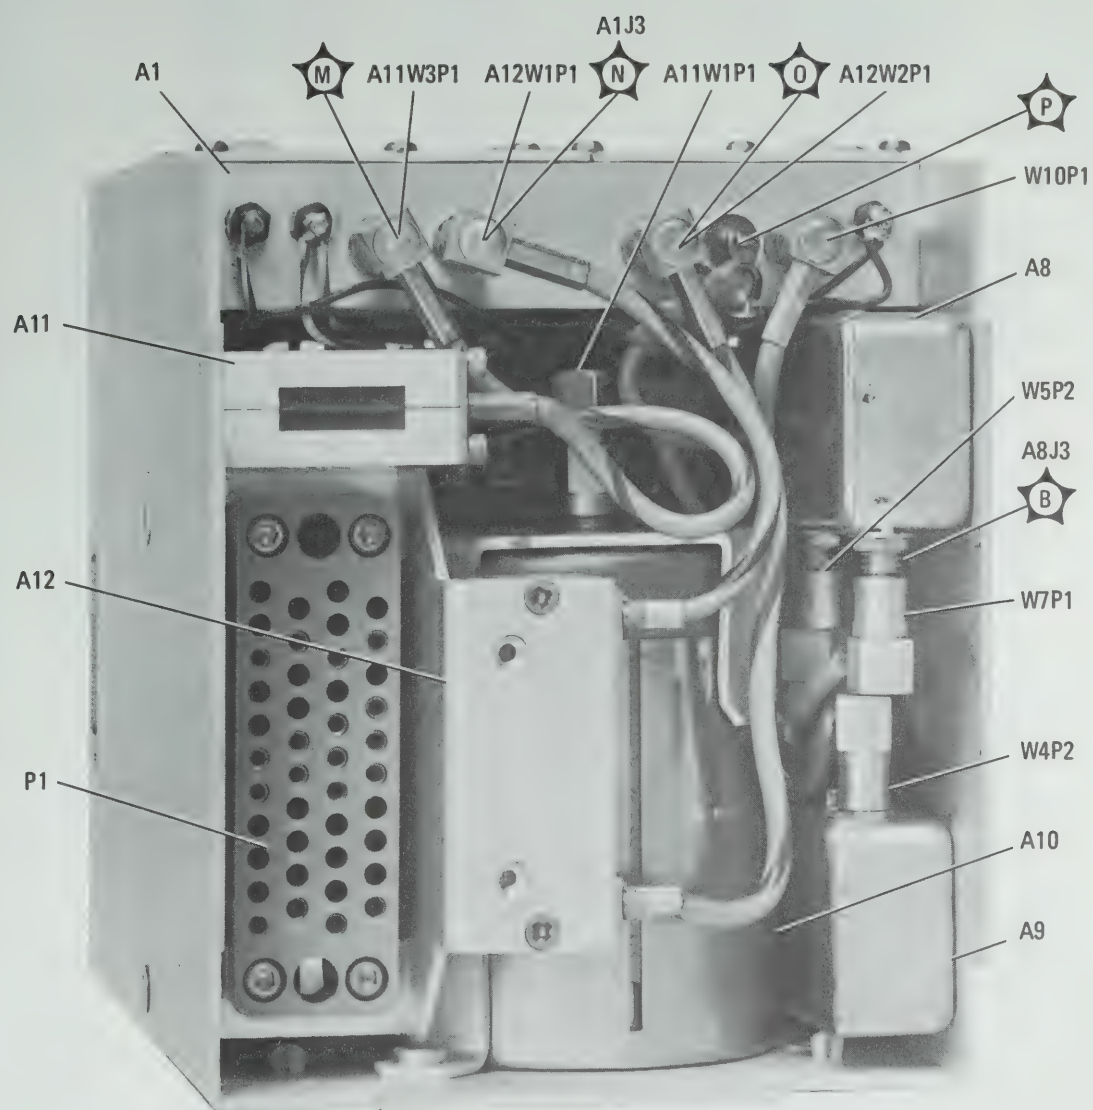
11661A Bottom View, Test Points and Assemblies
